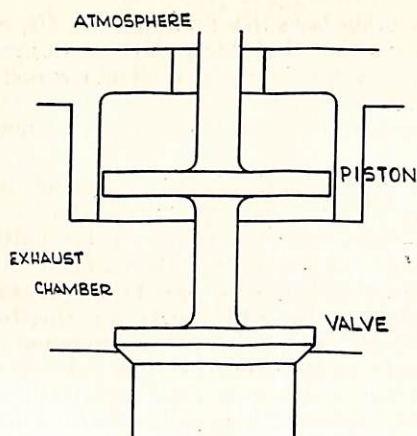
Valve Incorporating Piston for Lift Assistance.
